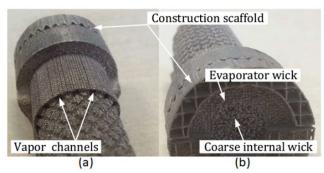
The HP's prototypes printed by SLM method (a) Sintered wick shape and b) grooved wick shape [41], [56].
